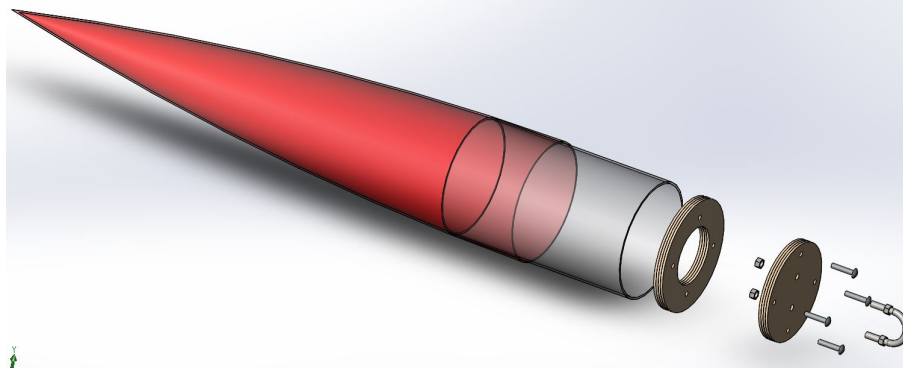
Exploded view model of the nose cone bulkhead/centering ring assembly inserted into the nose cone.
